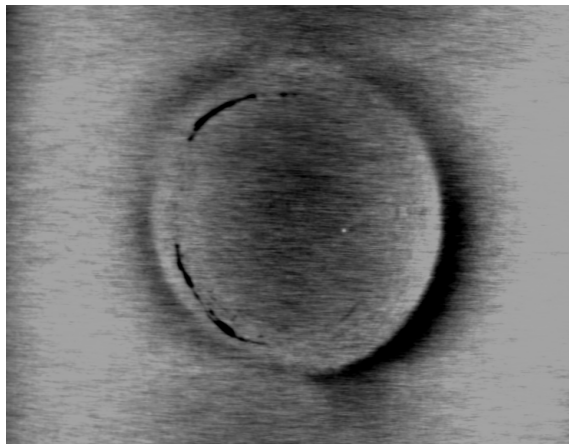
X-ray slice showing voiding in a weld produced by the wiper tool (the slice shown is from 0.39 mm below the joint interface; the image is approximately 20 mm across)
